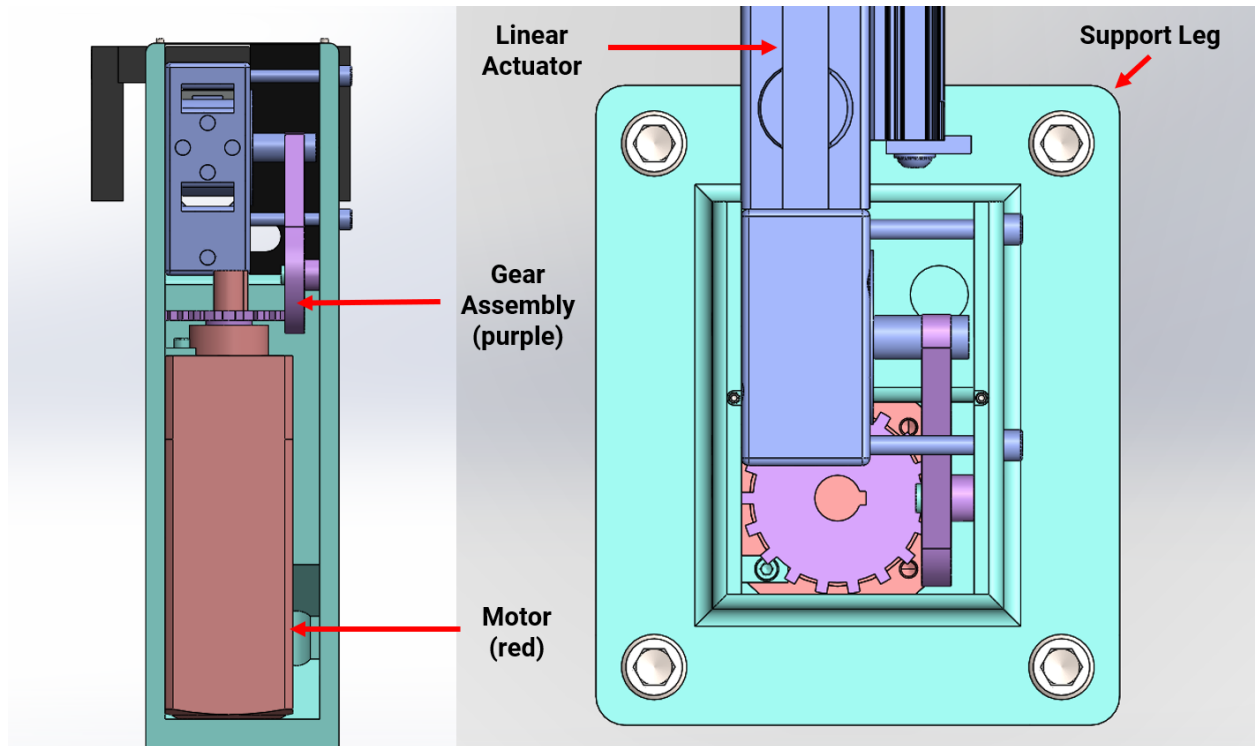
Support Leg Section View (left), and Top View (right), Detailing Internal Motor.
